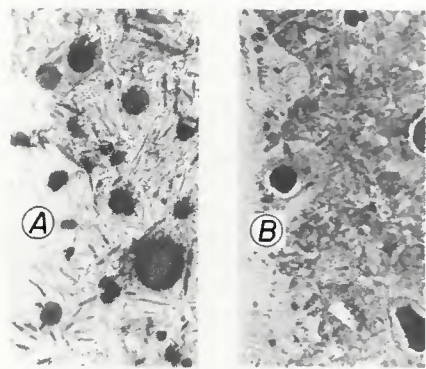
Partial fusion zone structure; as-welded condition. A—quenched after welding; B—slow cooled after welding
